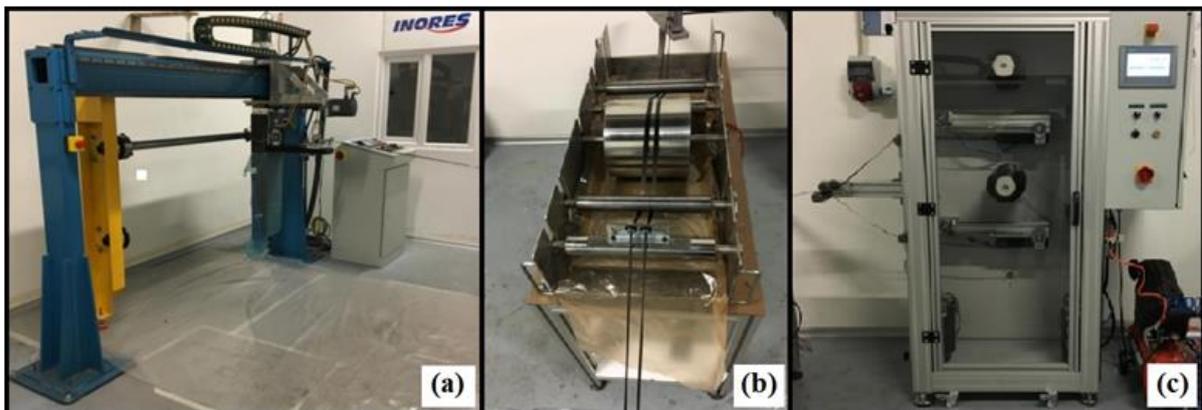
(a) Filament winding machine, (b) resin bath, (c) tension cabinet
